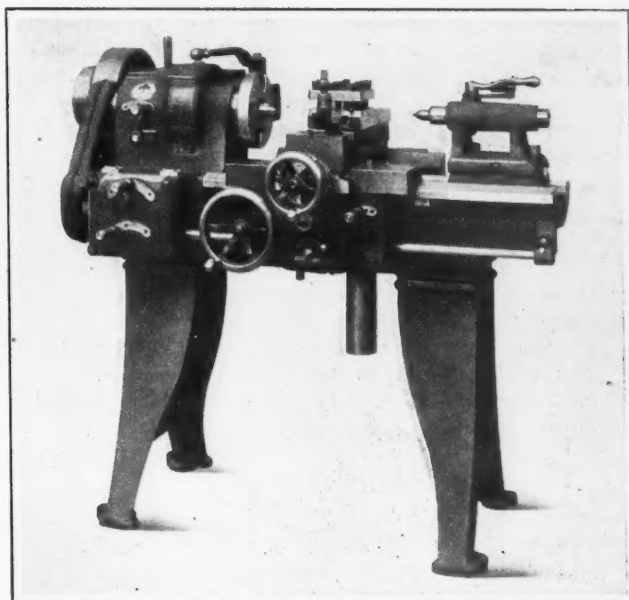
Eleven-inch Rapid-production Lathe placed on the Market by the R. K. LeBlond Machine Tool Co.
